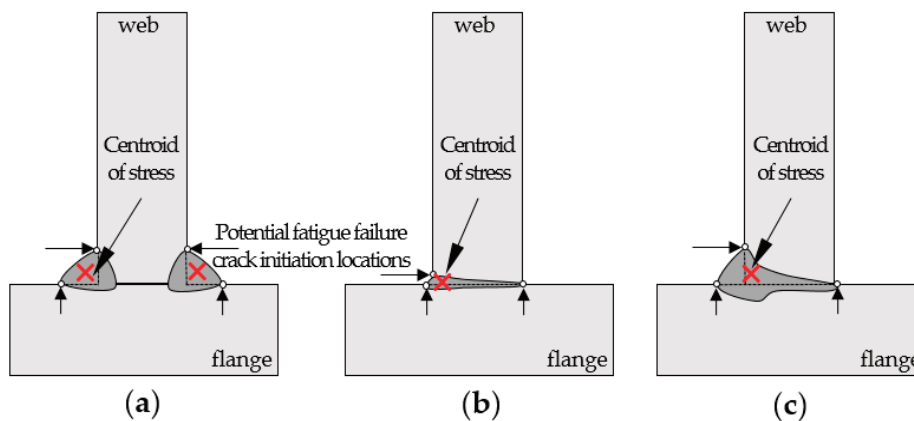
Comparison of weld joint geometries produced with: (a) arc welding; (b) autogenous laser welding; and (c) laser-arc hybrid welding, and stress concentration locations.
